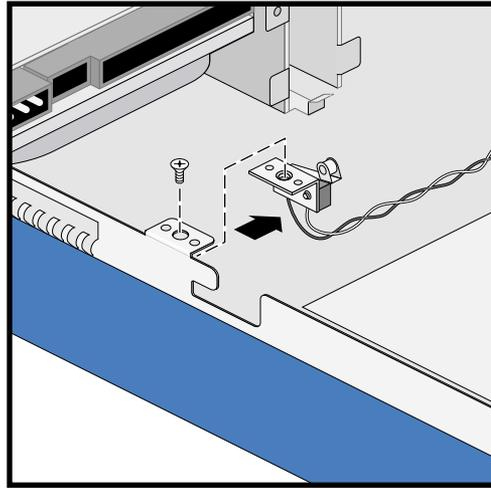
Removing the Intrusion Alert Microswitch Cable Module
